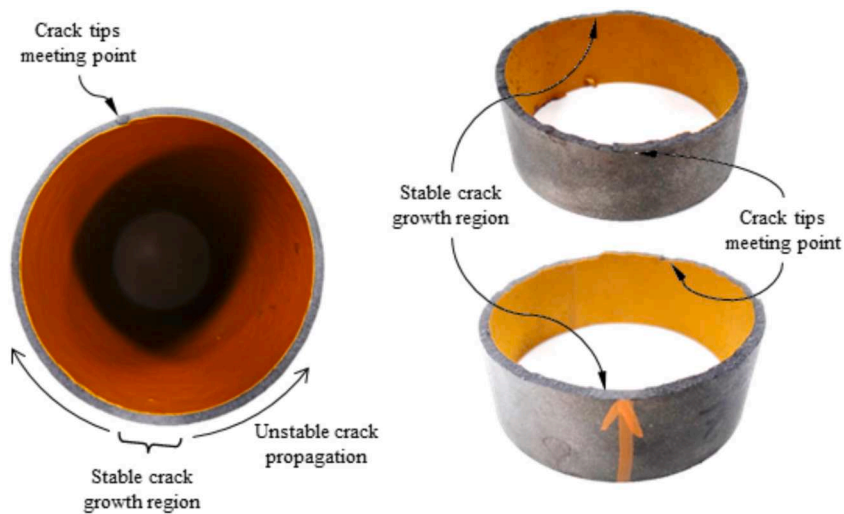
Labelled photographs showing the fracture surfaces of two specimens tested under uniaxial fatigue. The two right-hand images show the same specimen rotated through 180°.
